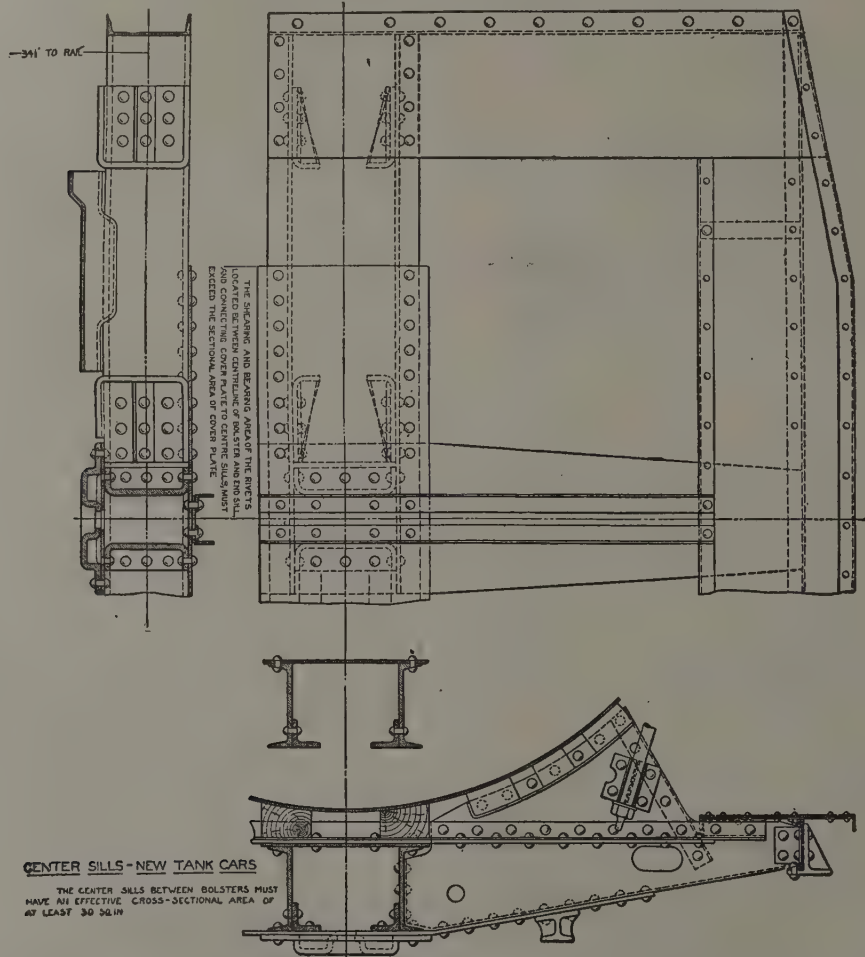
CENTER-SILL CONSTRUCTION, CLASS II TANK CAR.
